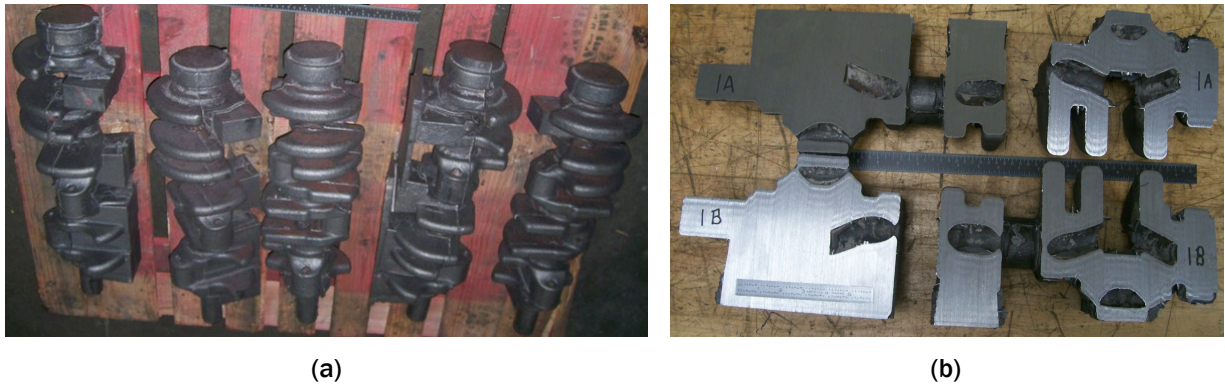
Pictures showing (a) the hollow cast-steel crankshafts that were made, and (b) the longitudinal sectioning of a crank. Source: GM.
